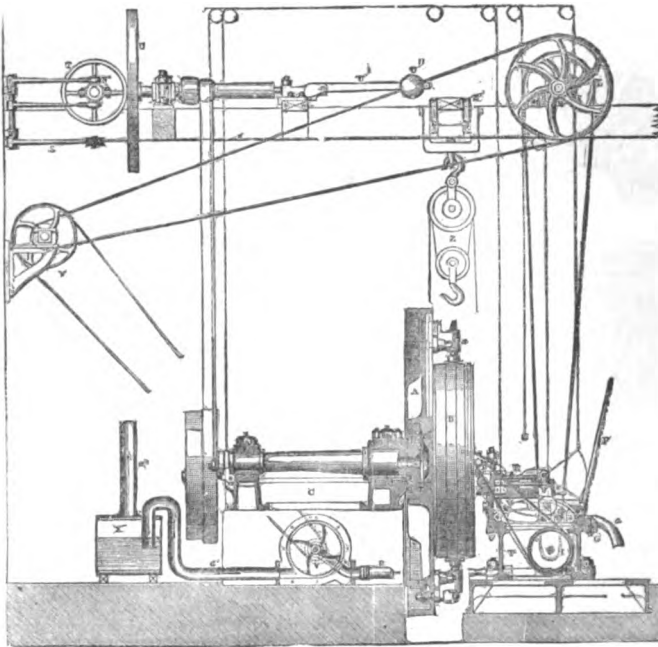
show a *Rogers'* diamond tool millstone dressing machine, illustrated in the "Bulletin de la Société d'Encouragement pour l'Industrie Nationale."
